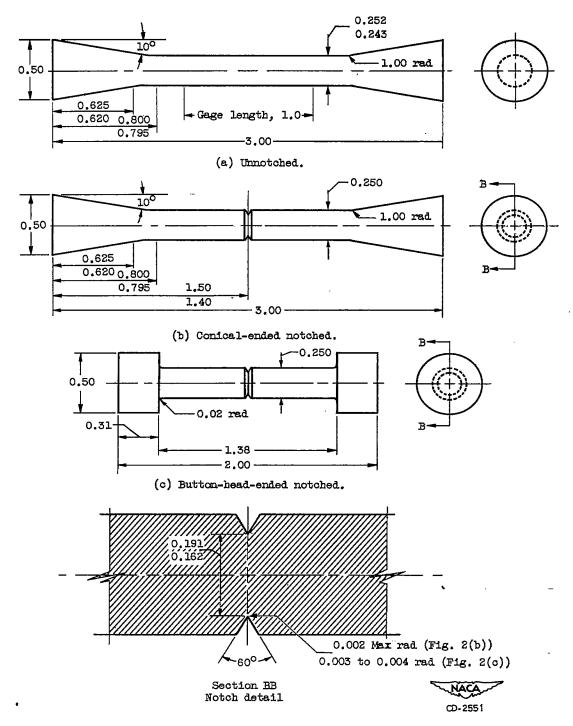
Tensile specimens. (All dimensions are in inches.)
